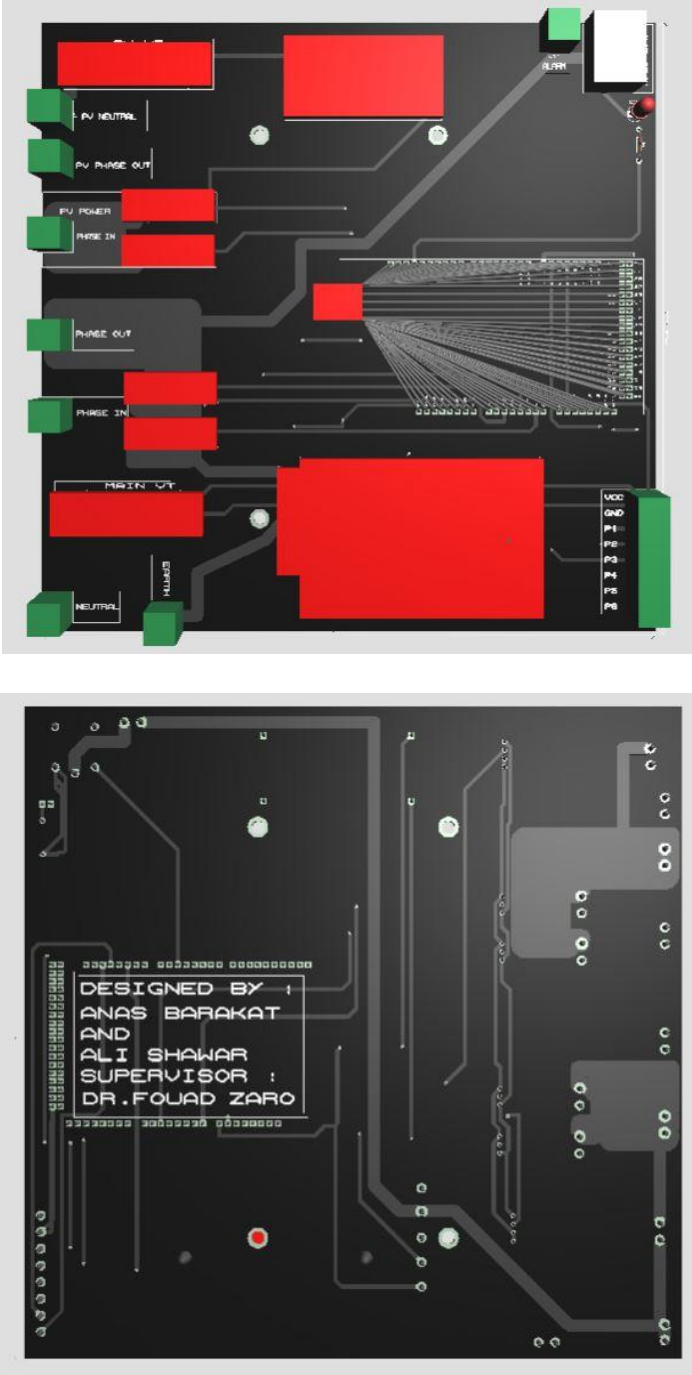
Master PCB top view b. Master PCB bottom view.
